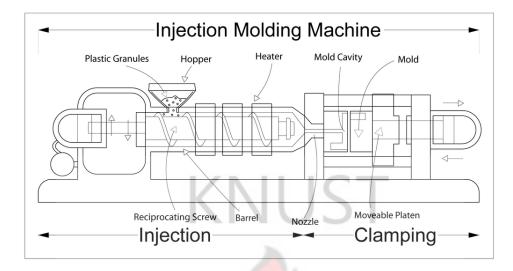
b A schematic diagram of a typical injection moulding machine
